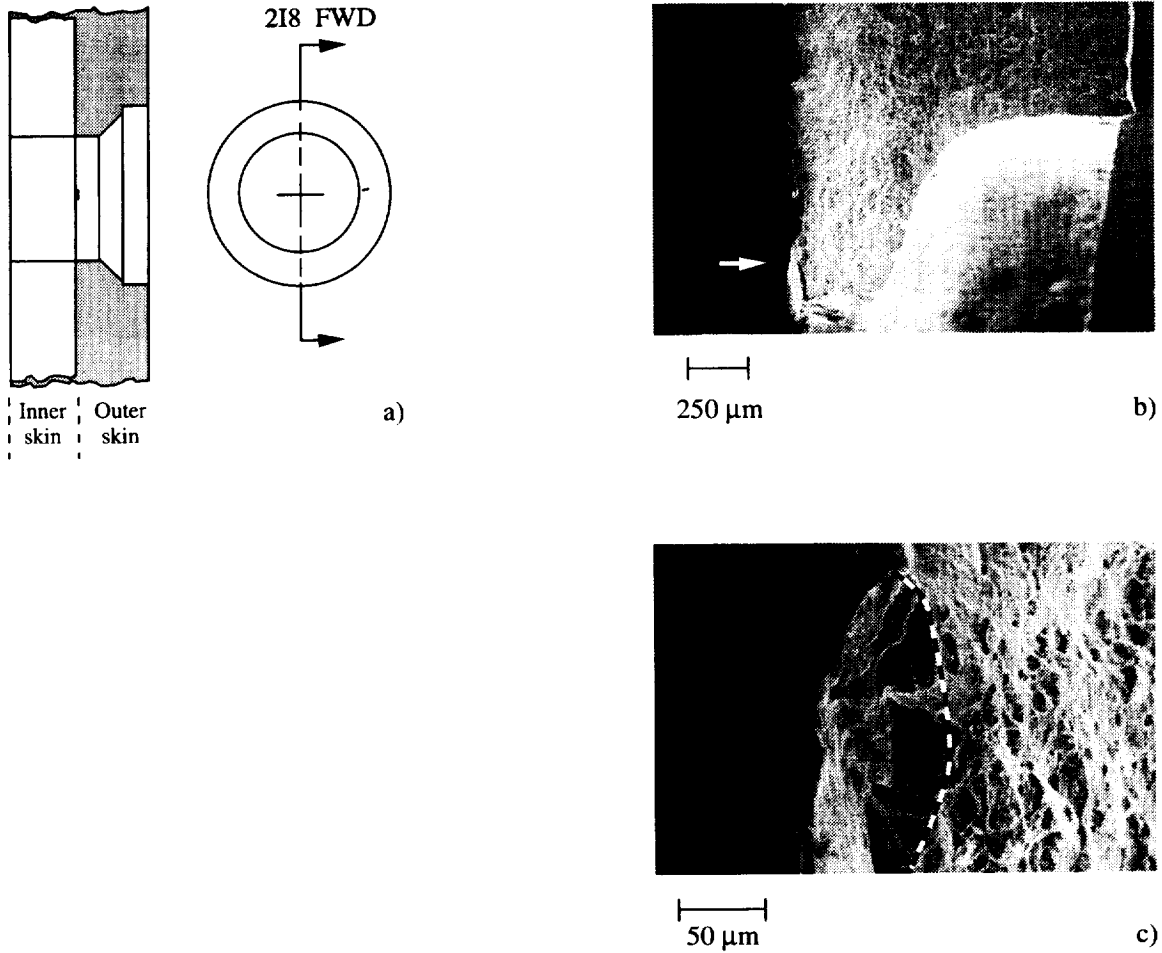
a) The schematic shows the rivet hole 2I8 configuration and the location of the outer skin fatigue crack oriented in the forward direction and about the 3 o'clock position. b) The SEM micrograph shows a small fatigue crack (marked by the arrow) located at the faying surface c) The SEM micrograph shows the small fatigue crack contained in the clad layer at high magnification. The dashed line marks the fatigue crack front. The crack initiated in a roughened surface region at the faying surface.
